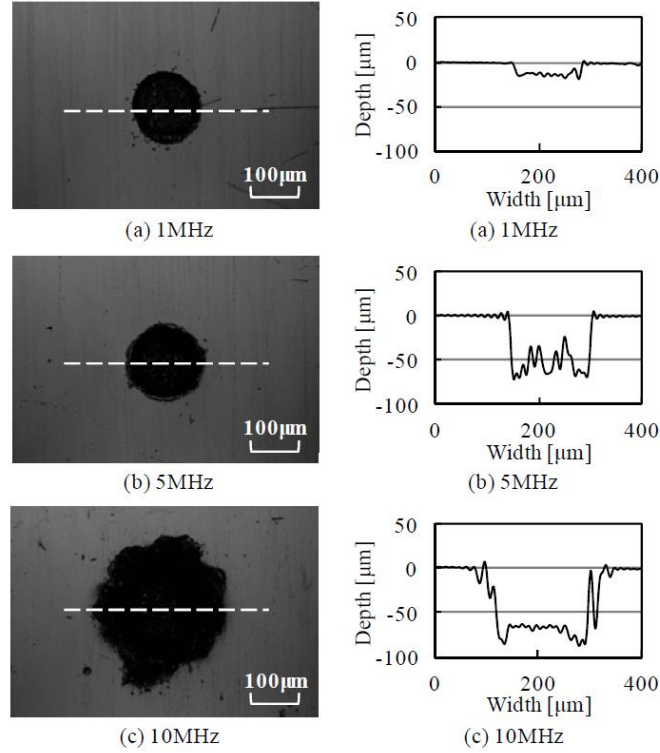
Machined hole and cross sectional shape at different frequencies using tool electrode $125\mu\text{m}$ in diameter [9]
